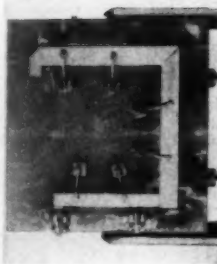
Simple jig for welding square steel tubing components consists of clamps and locating pins.
